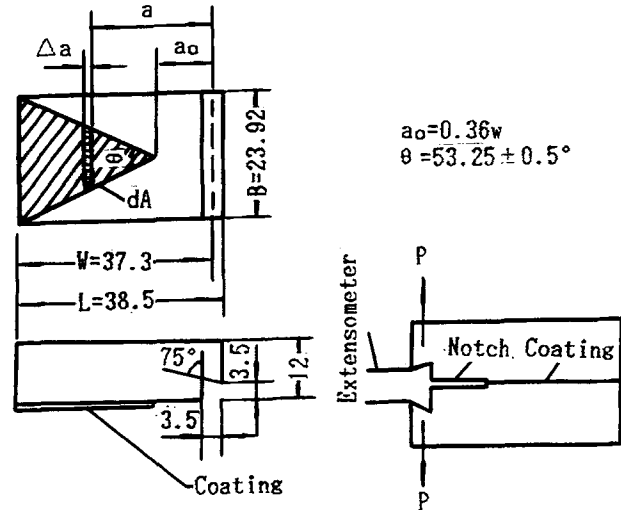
Specimen geometry and extensometer placement for the short bar (SB) method of finding coating fracture toughness.
